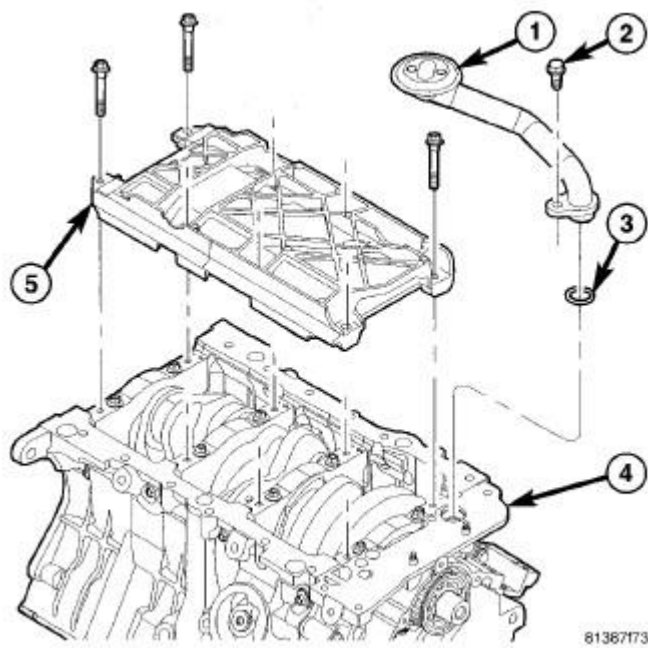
WINDAGE TRAY AND OIL PICK UP TUBE
